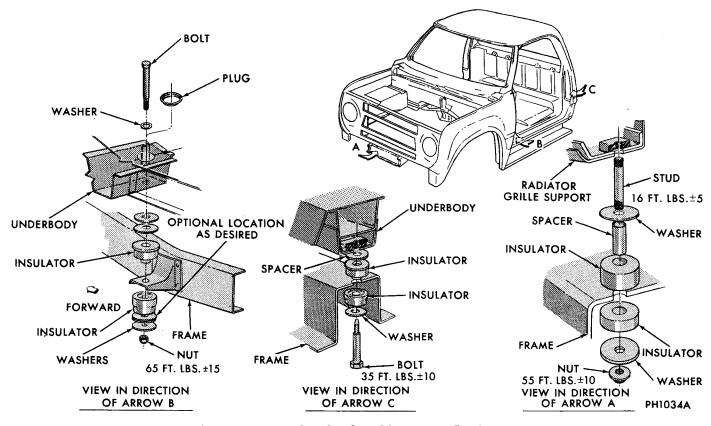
Front End and Cab Hold Down (D-5,6,8, W6)
